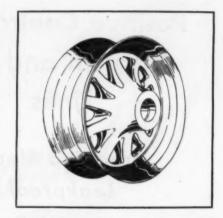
Former construction had cast steel hub welded to rolled steel rim
